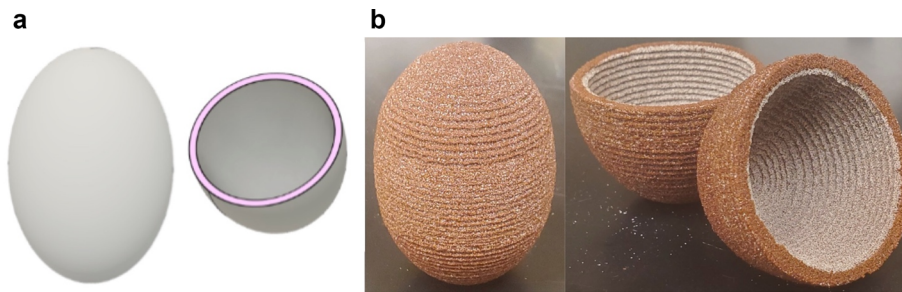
Eggshell solid model (a) and sand test print (b). The eggshell was later cut open to reveal the internal structure.
